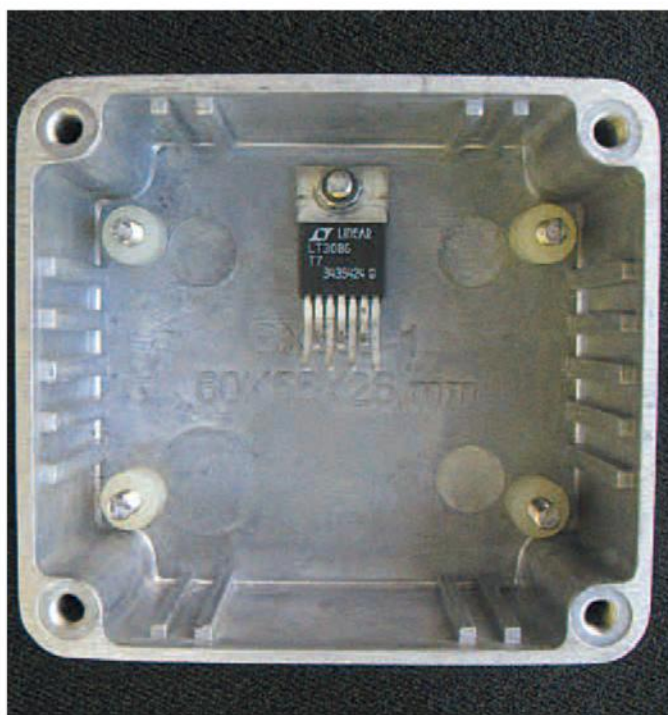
Photo E. Regulator mounted on the bottom of the enclosure, with standoffs and screws prepared to the receive circuit board.
